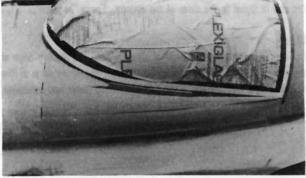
Foam being fitted between canopy and top longeron canopy sill.
